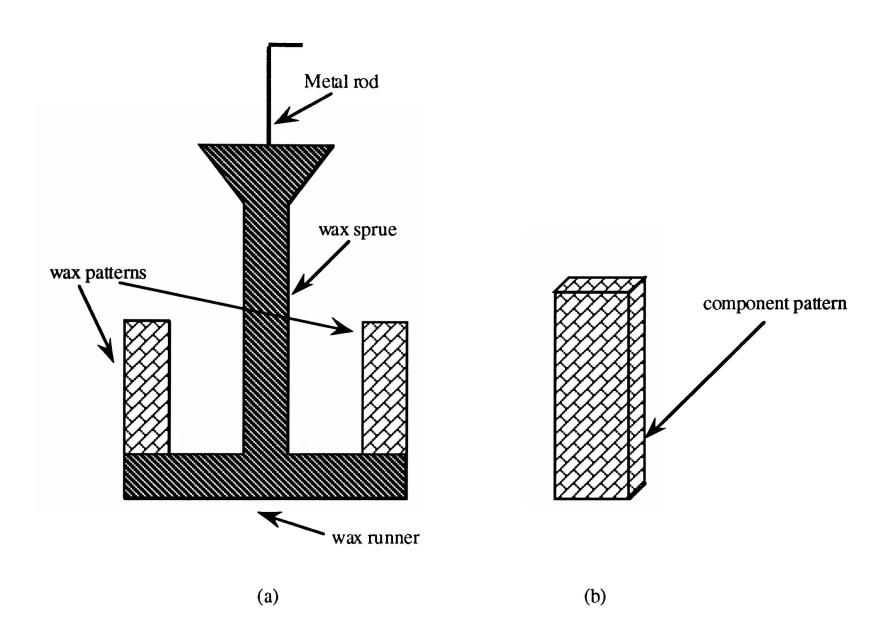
(a) wax runner and pattern assembly (b) component pattern
